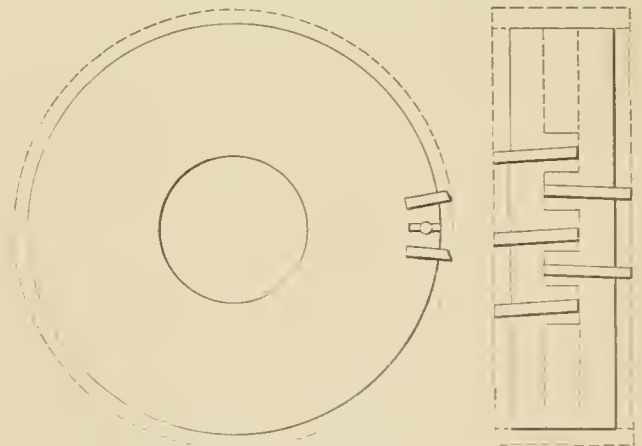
INSERTED TOOTH CUTTER WHICH MAY BE ADJUSTED FOR WIDTH.
